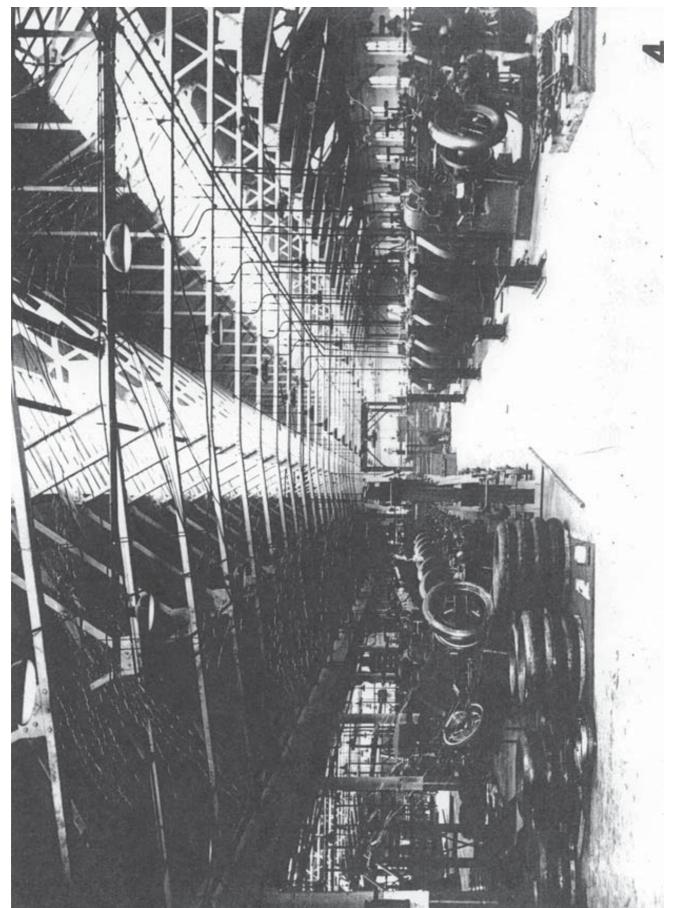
Interior of Building 8, west range, looking south, undated *c*.1926?. Note form of windows to exterior elevation (right). Original photo: C A Eisenhofer, Arcade Studios. Source WALS ref. DB/20/F82
